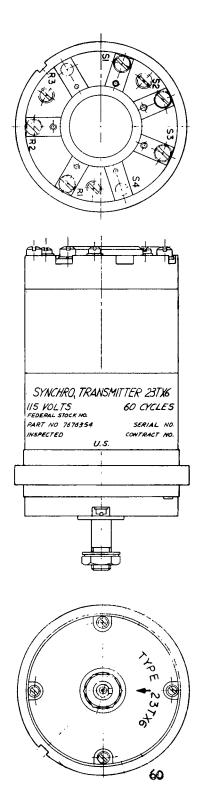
Synchro, Transmitter Type 23TX6 - assembled view
